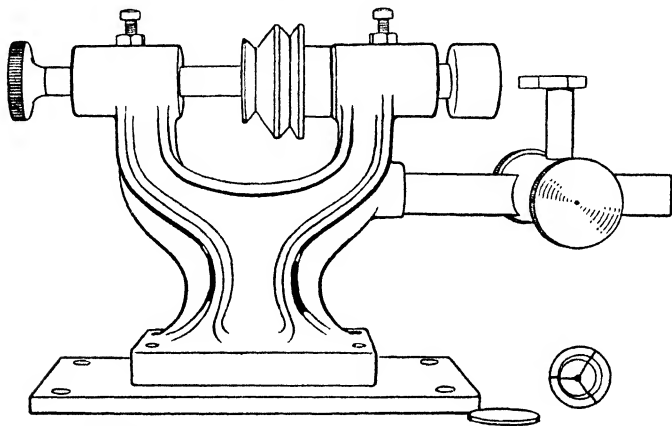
Small turning lathe for the preparation of diamond dies similar to Fig. 36. When in use this machine has to be provided with a receptacle for the catching of the diamond dust produced (see Fig. 32)
